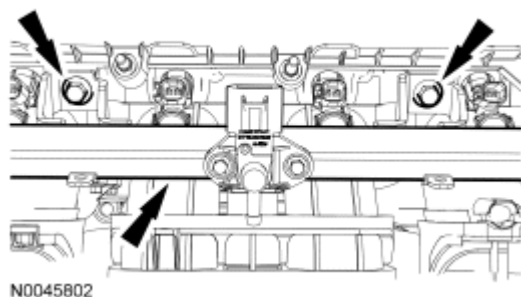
Locating Fuel Rail Bolts And Fuel Rail
